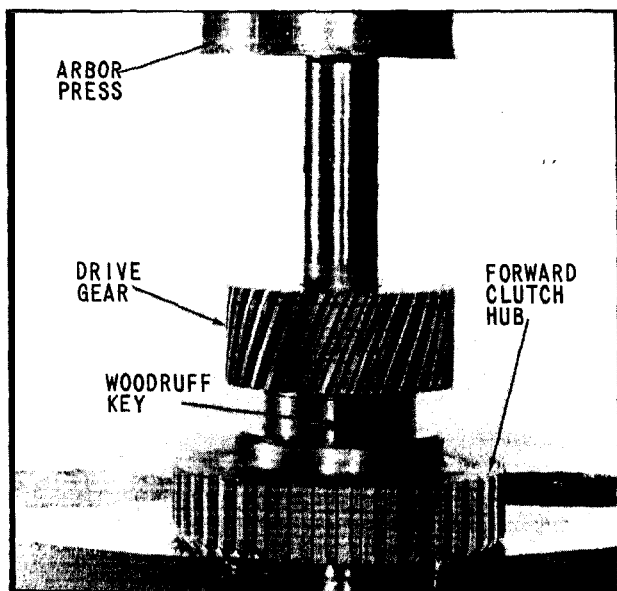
Pressing Drive Gear into Forward Clutch Hub
